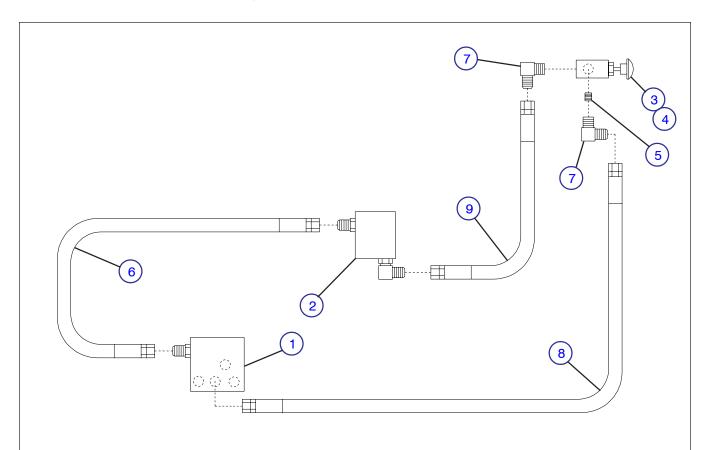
HYDRAULIC/ELECTRIC CABINET HYDRAULIC HOSE CONNECTIONS (Machines With Serial # 30167 and Above)
